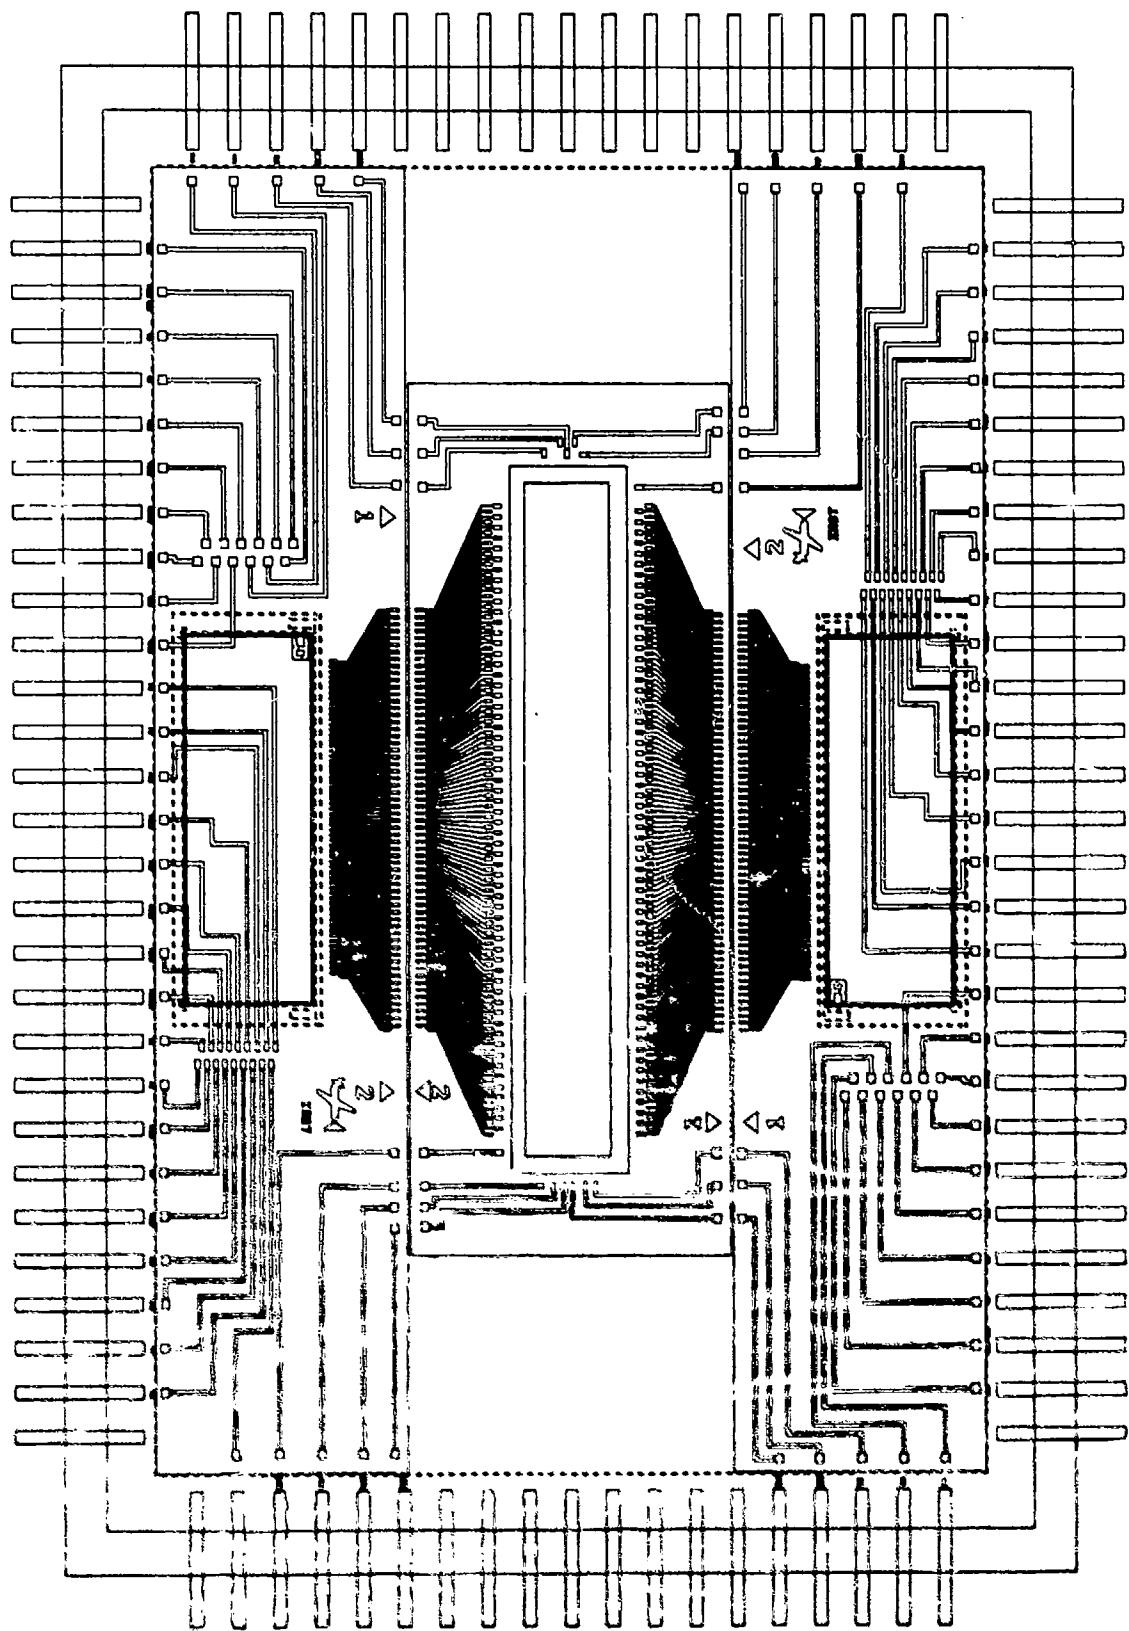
IRST composite carrier design in standard 96-pin package layout.
